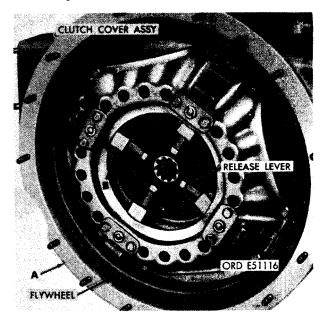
DISCONNECTING CLUTCH COVER ASSEMBLY.
